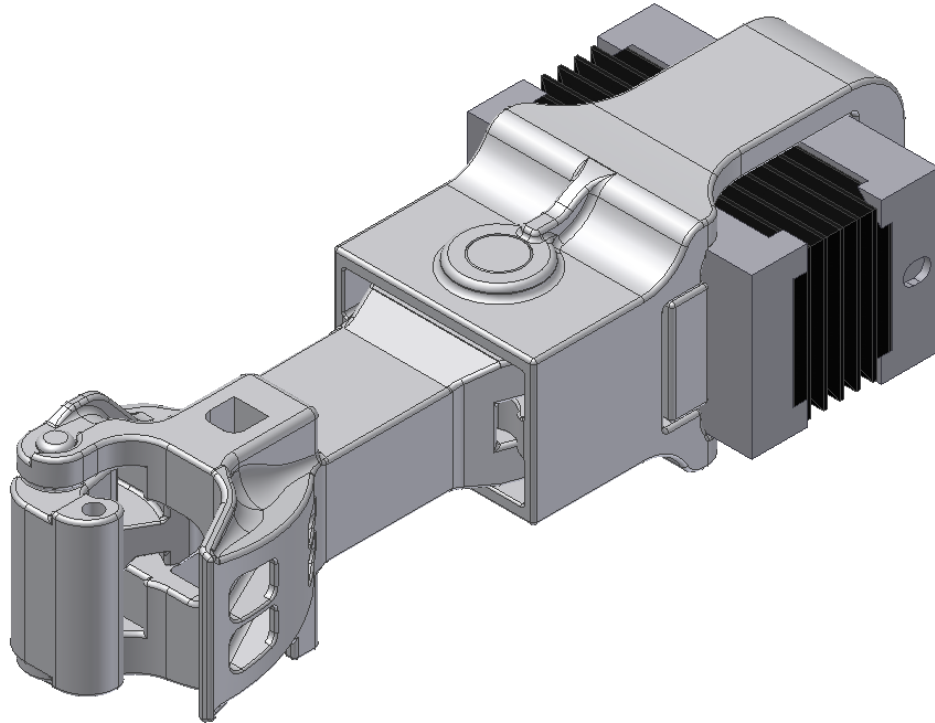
CAD Model of a Coupler-Draft Gear Assembly Developed and Used in FEA
